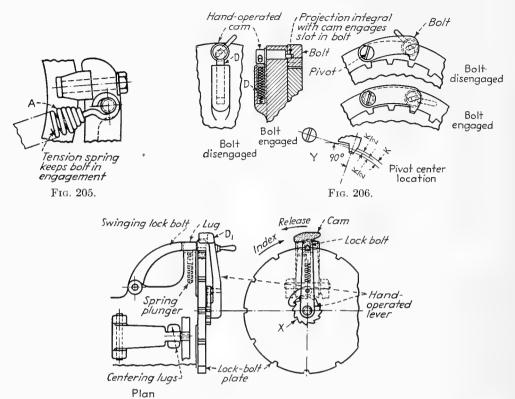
By using a lock-bolt plate larger than the work, the indexing error is diminished. The swinging lock bolt is released automatically by the spring plunger, which has a predetermined movement, when the hand-operated lever is moved to the left, as shown by the arrow marked Release, and the cam contacts the rounded top surface of the lock bolt. The ratchet is keyed with the lock-bolt plate to the spindle. As the lock bolt is released and the lever is rotated 30 deg. counterclockwise, the pawl engages the next tooth in the ratchet wheel at X. The lever is then pulled in the direction of the arrow marked Index, the cam moving the lock bolt downward into the next opening in the lock-bolt plate. The plan view of the bolt shows the two centering lugs between which the lock bolt is additionally supported.
